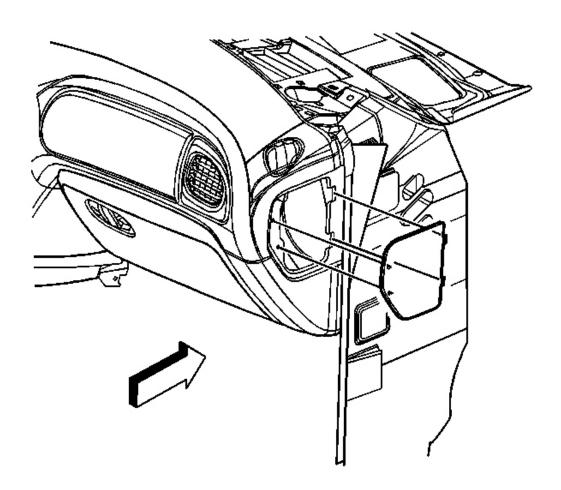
Identifying Right I/P Access Cover Courtesy of GENERAL MOTORS CORP.
